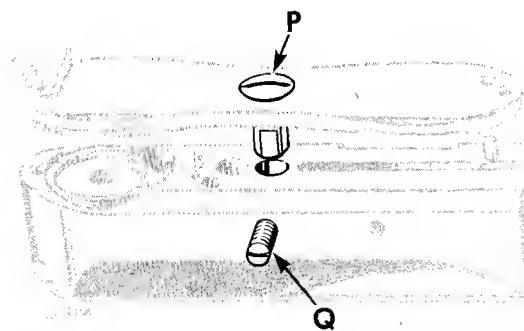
Correct Position of Hinge Pin in Needle Plate
